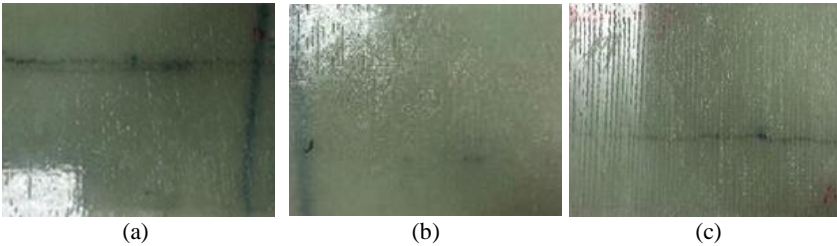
Produced composite plates: (a) Hand Lay-up (b) Vacuum Bagging (c) Vacuum Infusion
